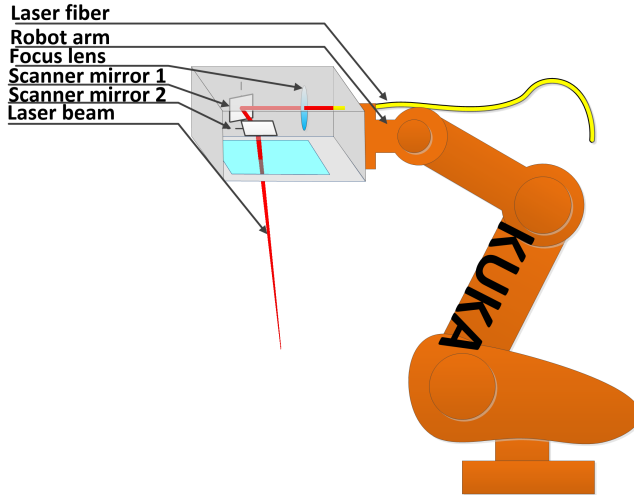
A sketch of a remote laser cutting setup. The remote position reduces the risk of tool workpiece collisions and allows fast repositioning of the laser beam.
